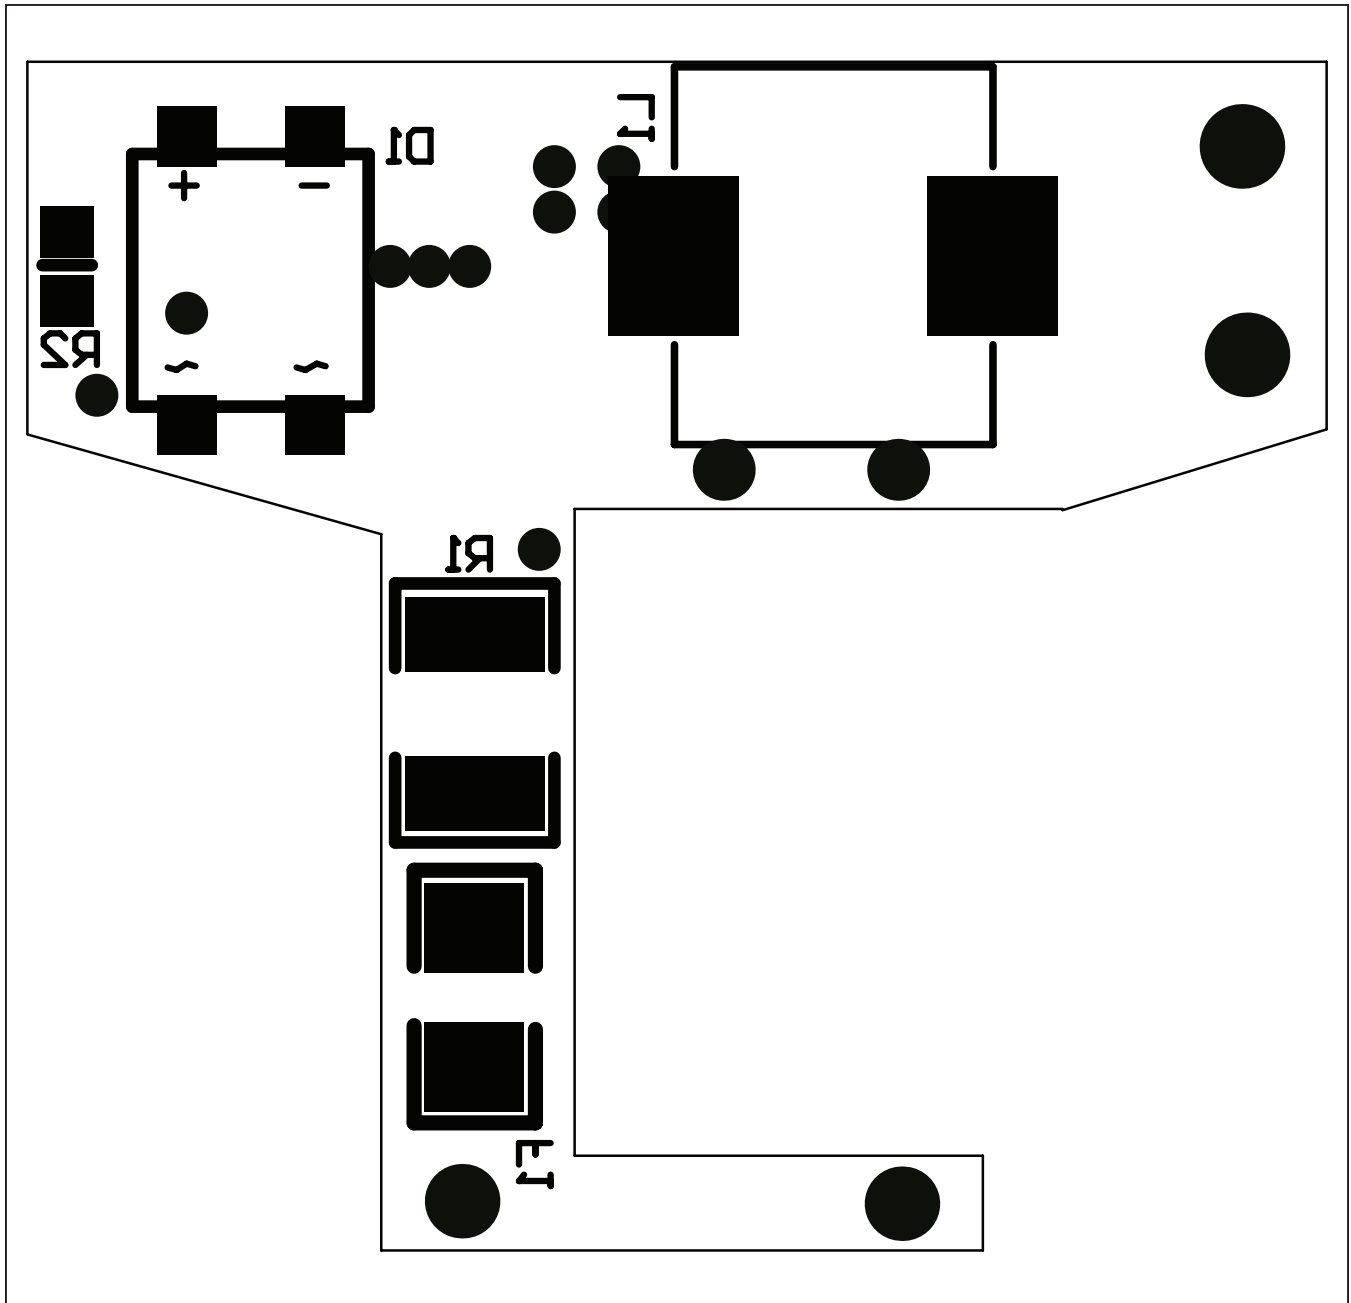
MAX16840L EV Kit Component Placement Guide—Solder Side
